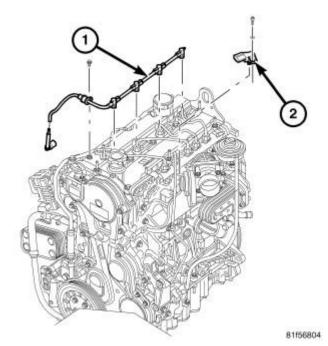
Camshaft Position Sensor Connector Courtesy of CHRYSLER LLC
